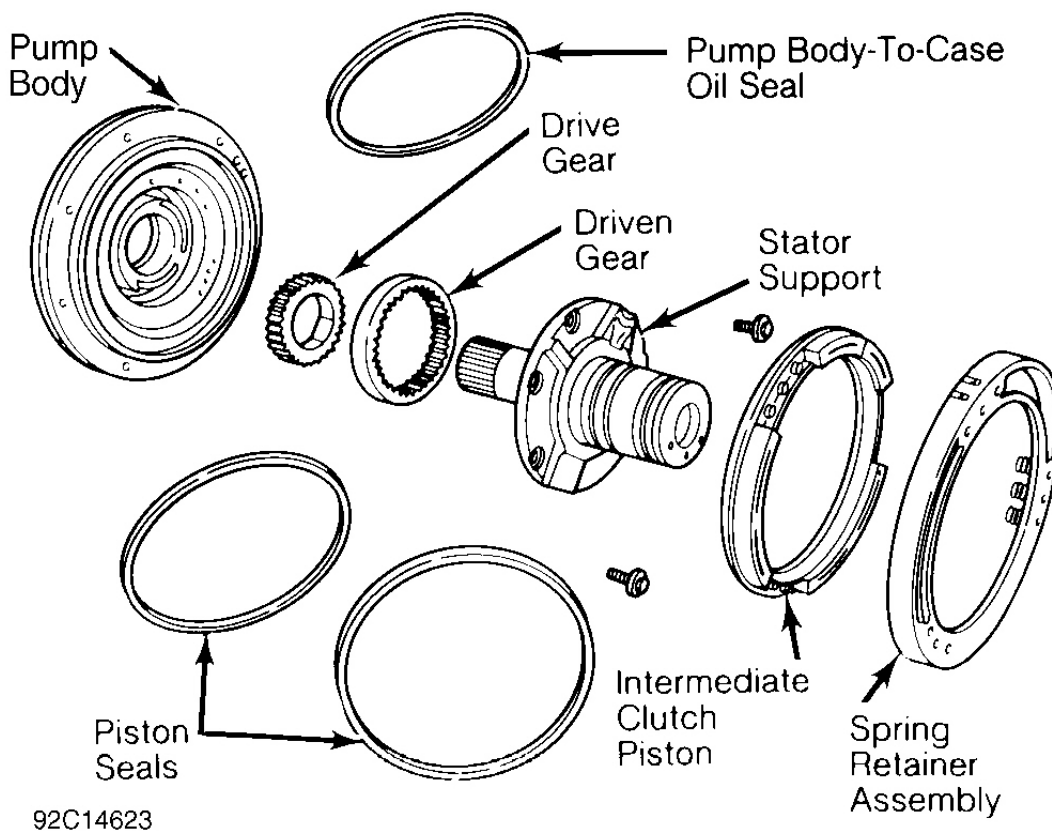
Exploded View of Oil Pump & Intermediate Clutch
